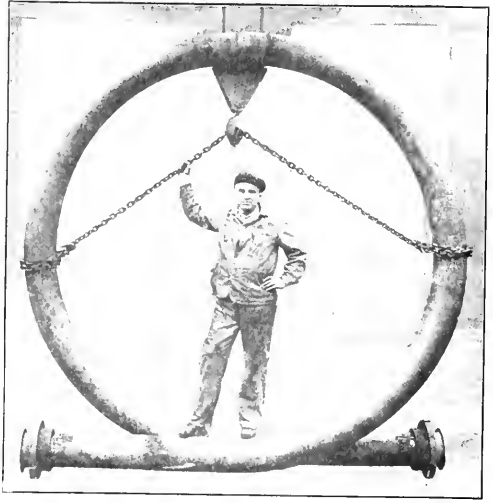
AN 8-IN. EXPANSION LOOP HAVING 37 FT. OF PIPE. NOTE WELD AT THE TOP JUST ABOVE CRANE HOOK
